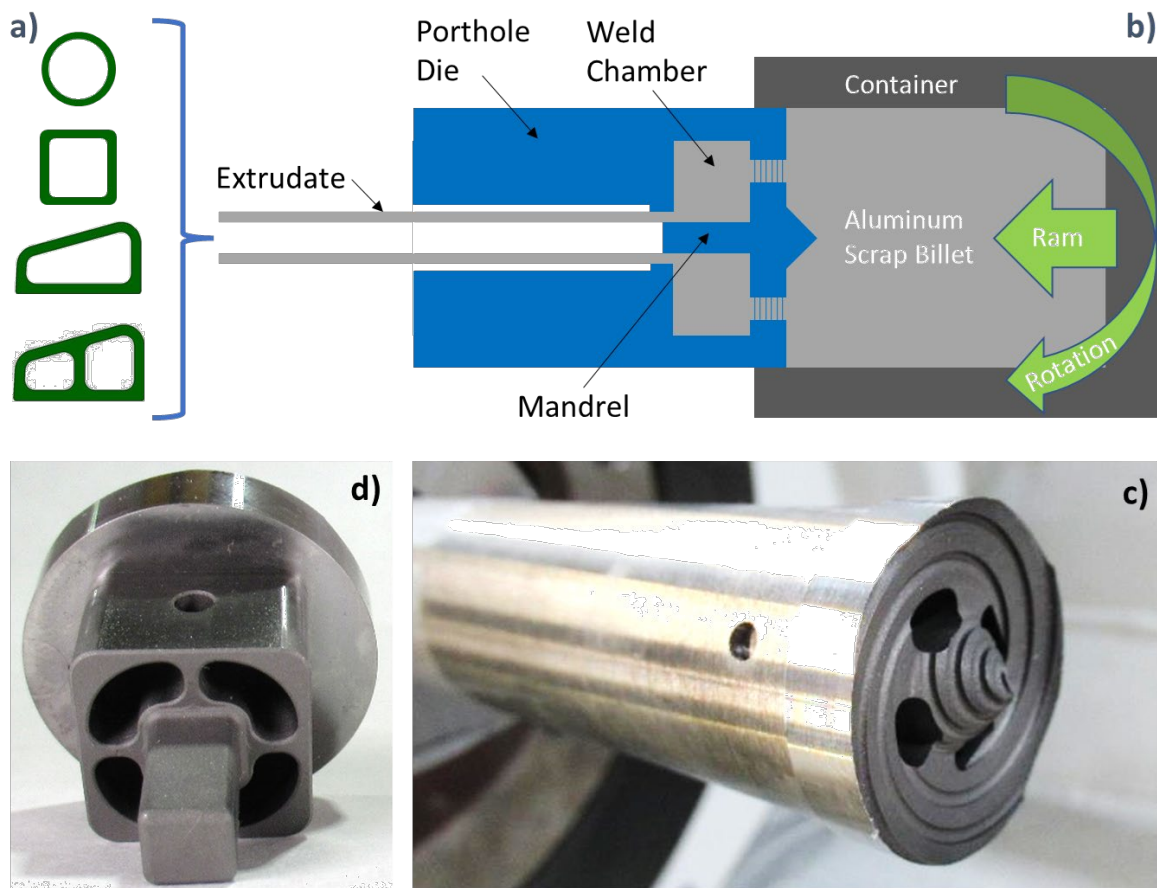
a) Extruded profiles manufactured using a porthole die integrated with the ShAPE process. (b) Schematic of porthole die integrated with a rotating billet. (c) Porthole die assembly with surface features to assist material flow. (d) Back side of porthole die head showing port exits and square mandrel. Source: PNNL
